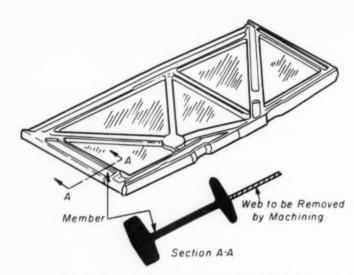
Truss Forged From Flat Stock, Remaining Webs to Be Cut Out. If this is done after blocking and before finish forging, part can be forged to closer tolerances and finish machining is minimized
